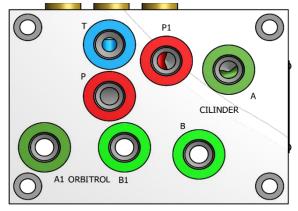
CONNECTIONS OF THE HYDRAULIC OPEN CENTER MANIFOLD
